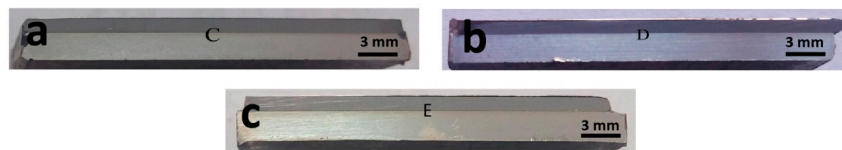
Weld cross-section morphology of VDW. (a) AZ31/DP600; (b) AZ31/ non-zinc-coated DP600; (c) Mg/DP600.
